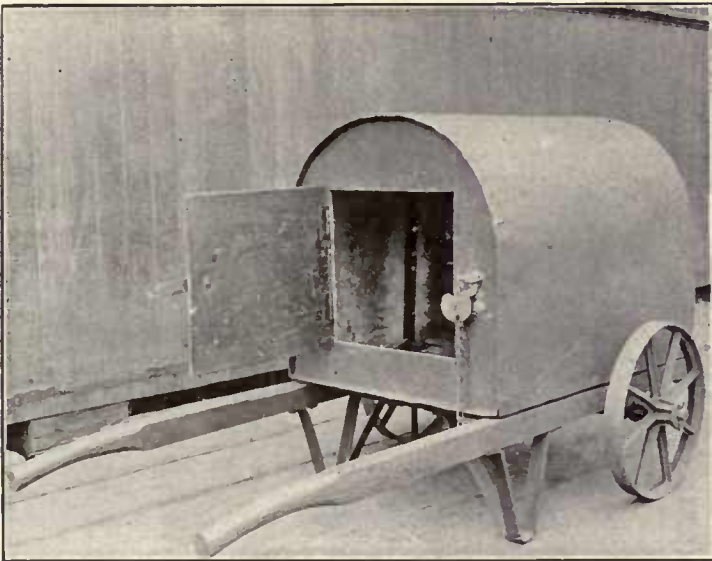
Portable Tool Box for Steel Car Repair Gang.
